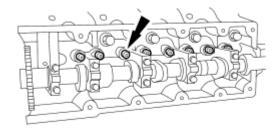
Identifying Special Tool (303-572) Courtesy of FORD MOTOR CO.
